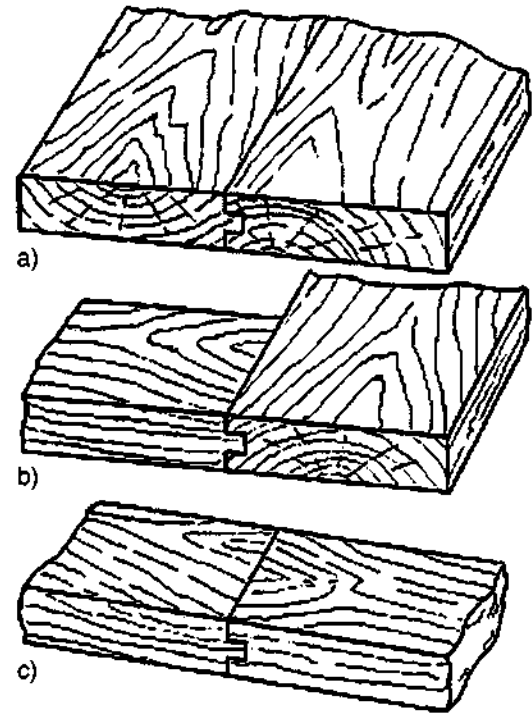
C4 Typical tongue and groove joints: a) edge-to-edge, b) end-to-edge, c) end-to-end.
